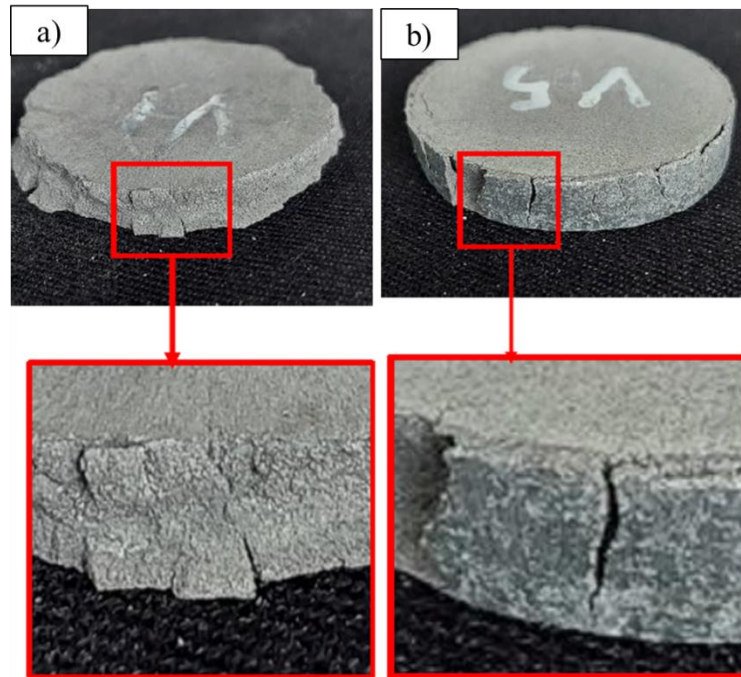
Fracture surface of the compressive test for different Cu contents (a) 21wt.% and (b) 33wt.%
